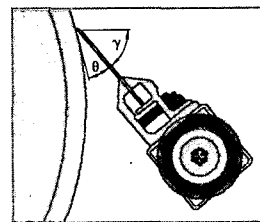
Setup angle(λ) and contact angle(θ) of the roll cleaner
